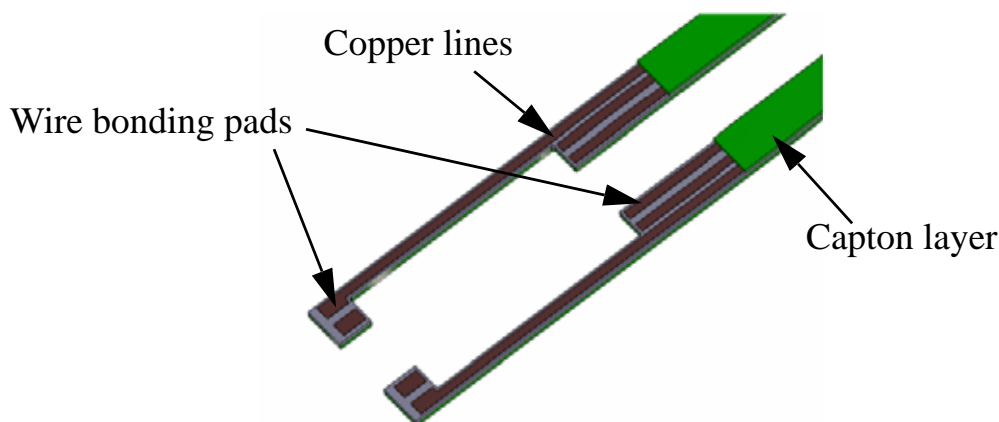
3D CAD front area view of Flexprint (Flexible circuit board).
